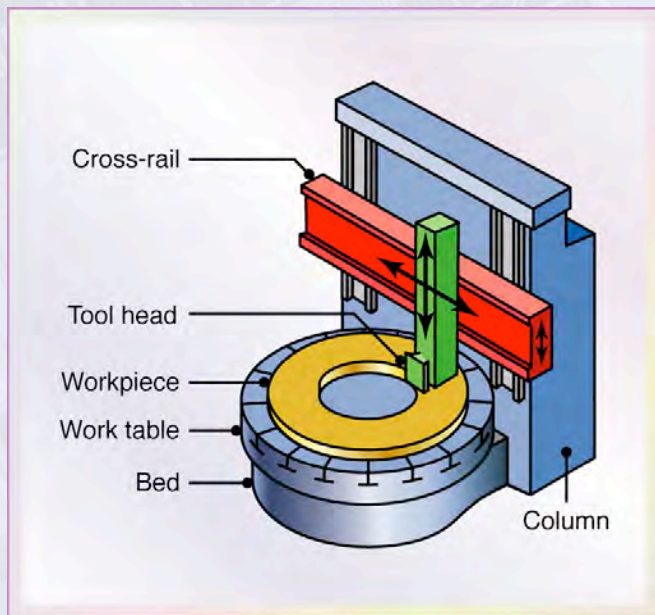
Schematic illustration of a vertical boring mill. Such a machine can accommodate workpiece sizes as large as 2.5m (98 in.) in diameter.
